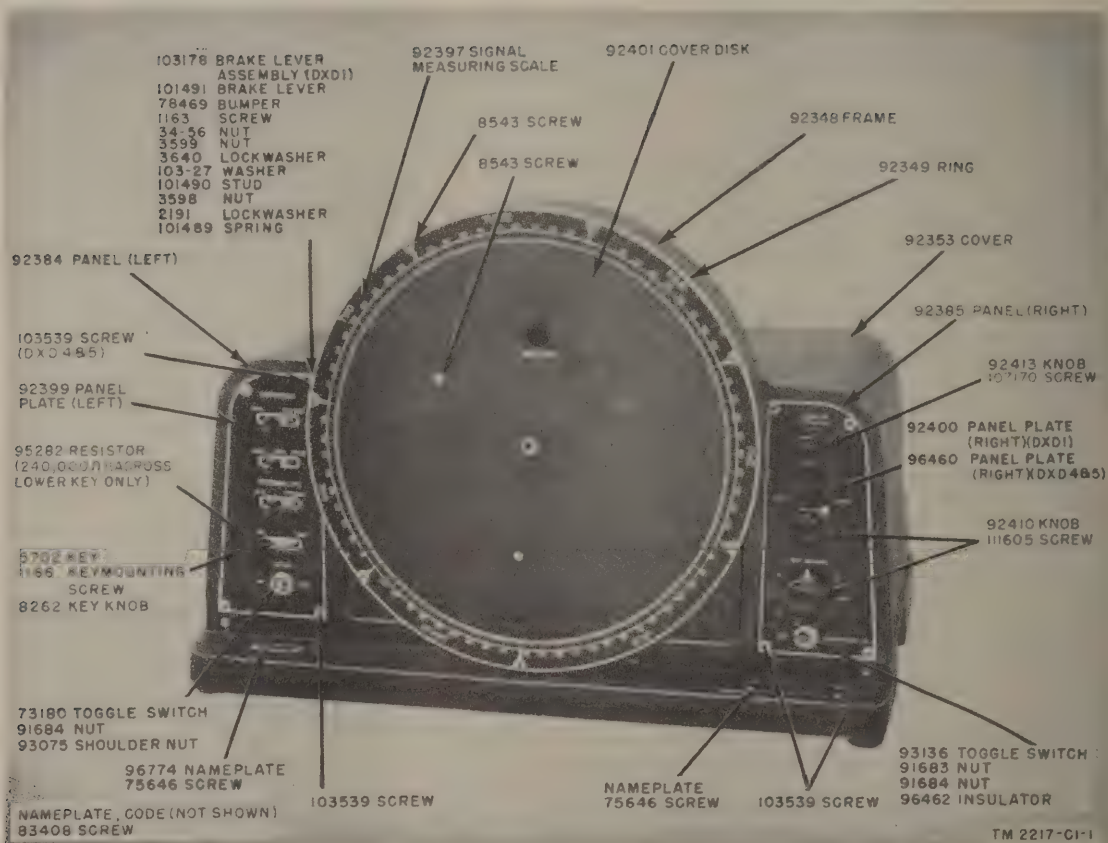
(Superseded.) Distortion Test Set TS-383(*)/GG, front view, hood removed, location of parts for DXD1, DXD4, and DXD5.
